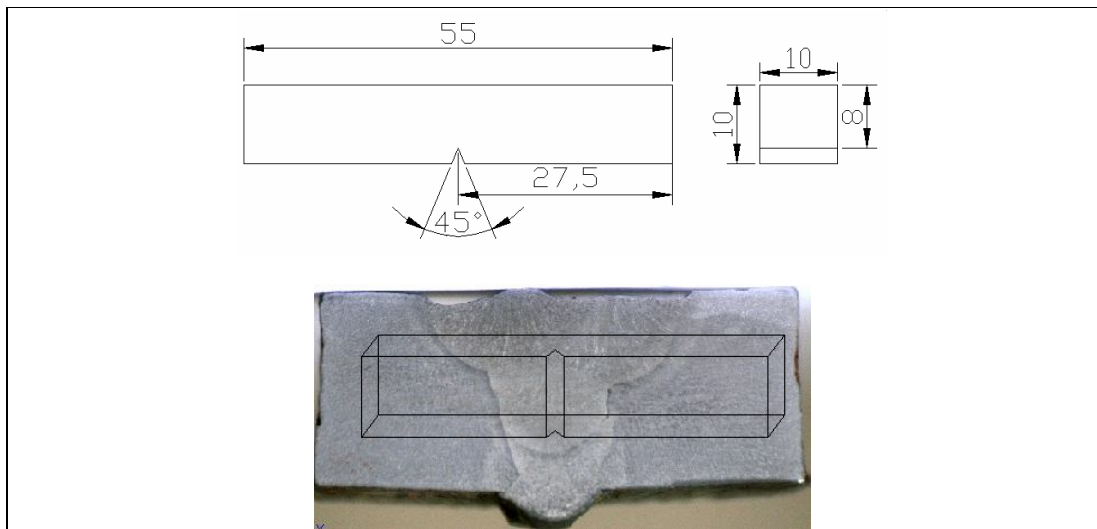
The specimen used in the impact test by the Charpy V-notch, dimensions in mm.
